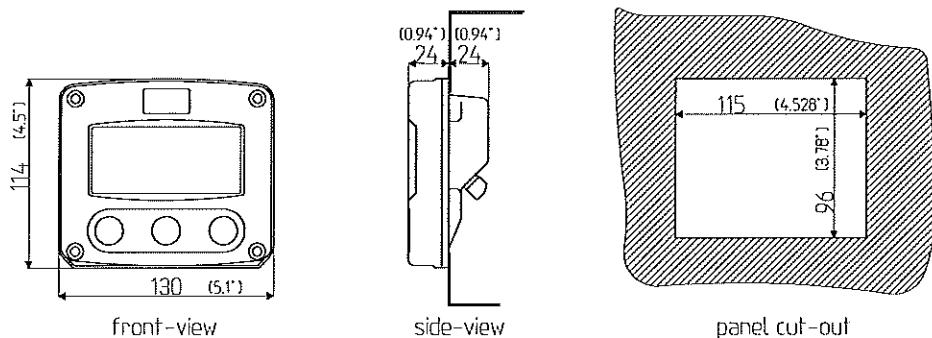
Dimensions of type HC - IP65 ABS Panel-mount casing / panel cut-out.
